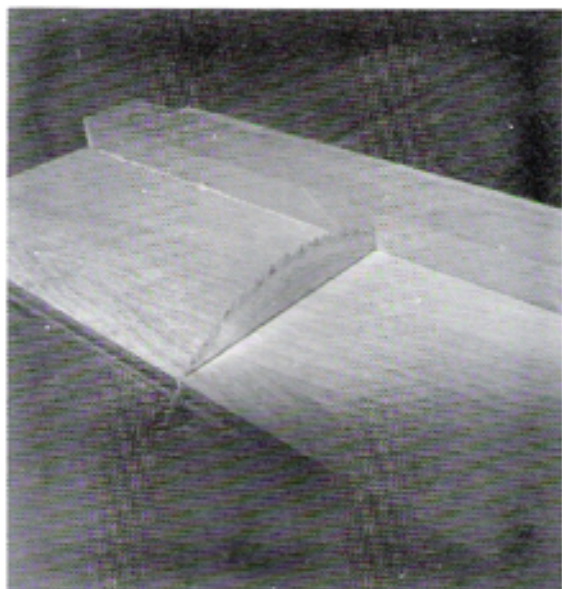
It is important not to cut all the way through your jig. Cut only deep enough to cut the part or the jig will be weakened.
